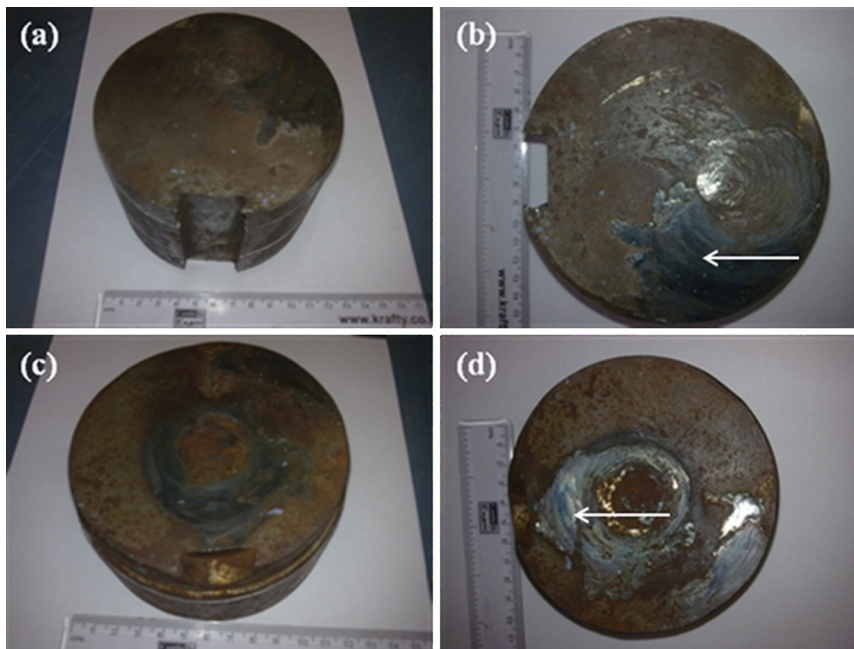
As-received samples. (a and b) Fractured portion towards coupling side. (c and d) Fractured portion towards gear box side.
